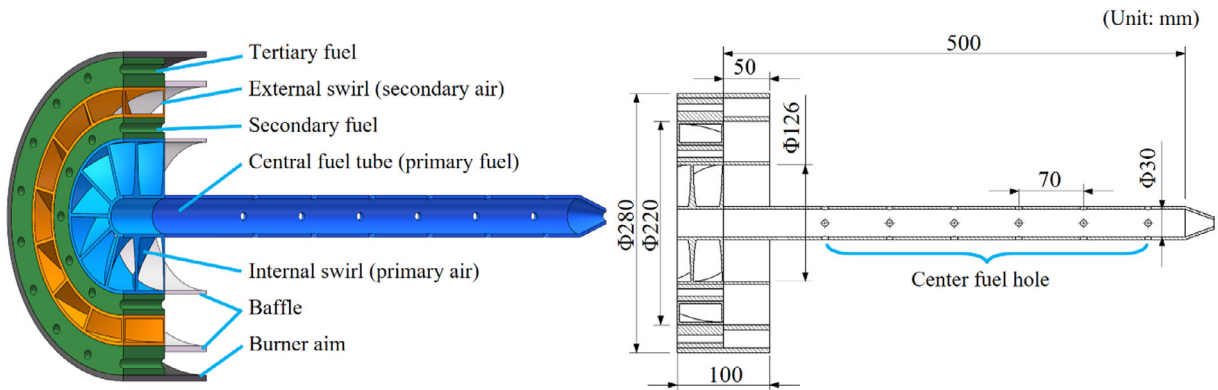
Cross-section view of the burner (left) and dimension marking (right).
